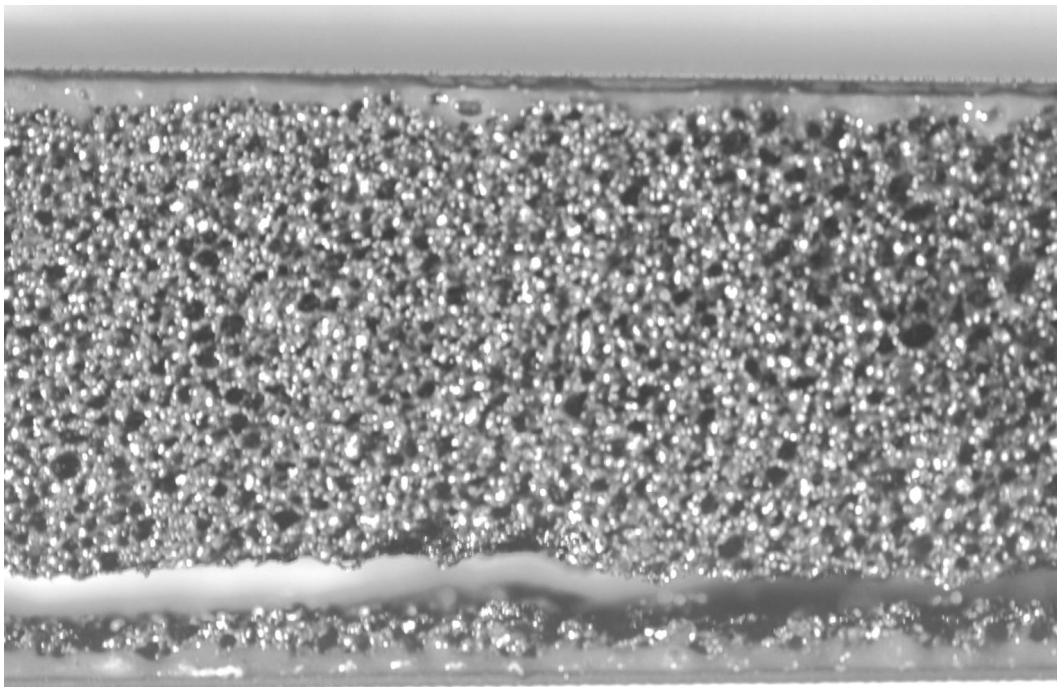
Failure Along Core/Face Sheet Interface (5×) (Specimen 9)
